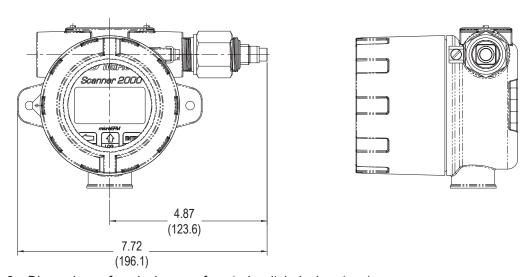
Dimensions of explosion-proof control switch; inches (mm)
